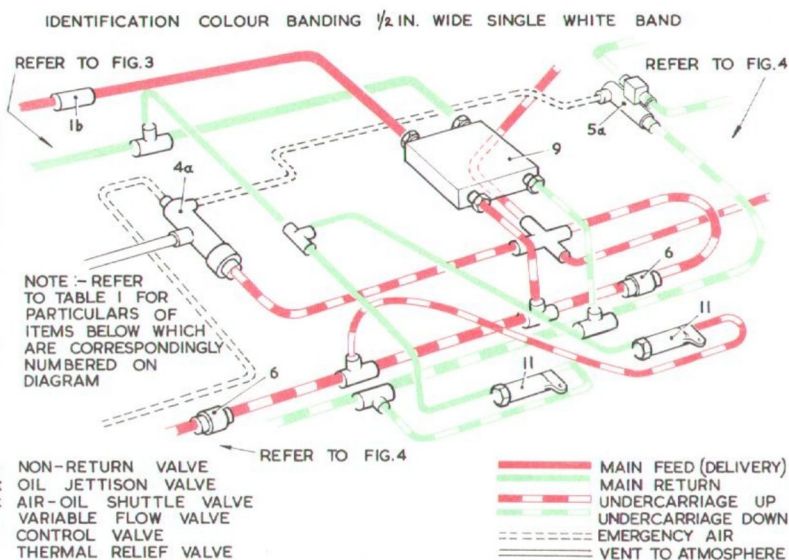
Hydraulic system (3) — Alighting gear control circuit
